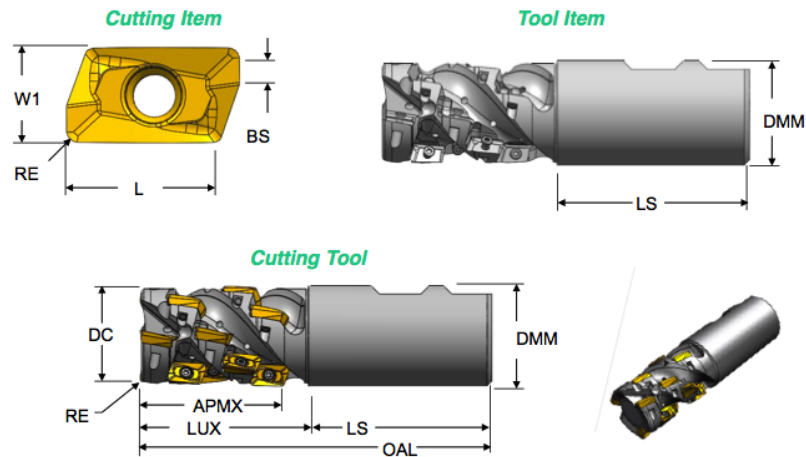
Cutting Tool, Tool Item, and Cutting Item
